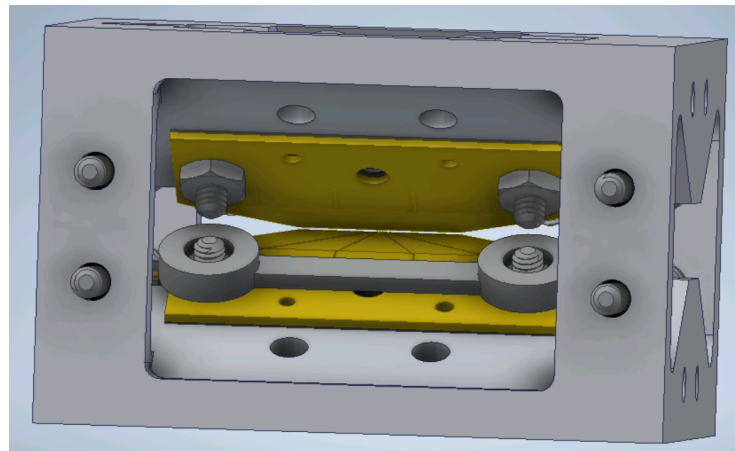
Double socket holder limiting the motion of the nuts on the gold coating and blocking the glove from touching the blades closely.
